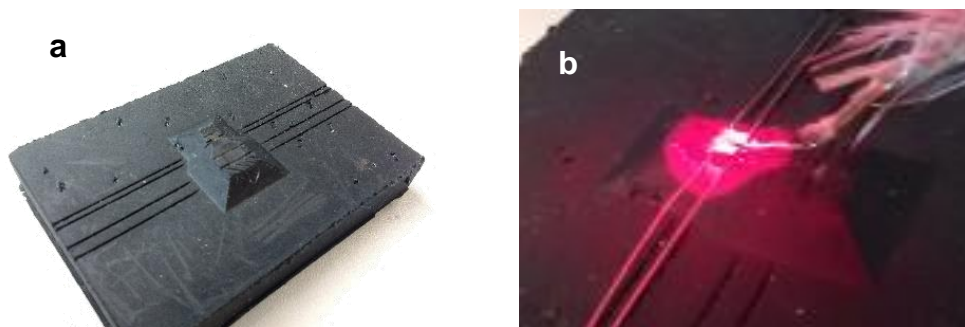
Black pigmented silicone used as the soldering platform for solar cells. (a) Photograph of the mould. (b) Magnified view of the soldering process.
